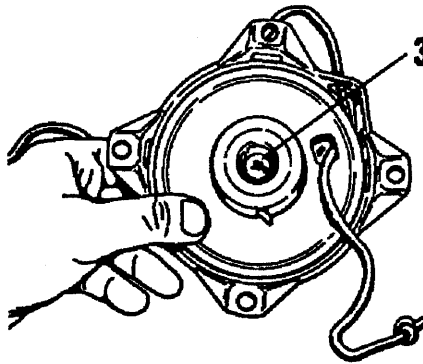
Refer to text when removing or installing rope. Retainer screw (3) should be torqued to 45-55 in.-lbs. (5-6 N·m).
